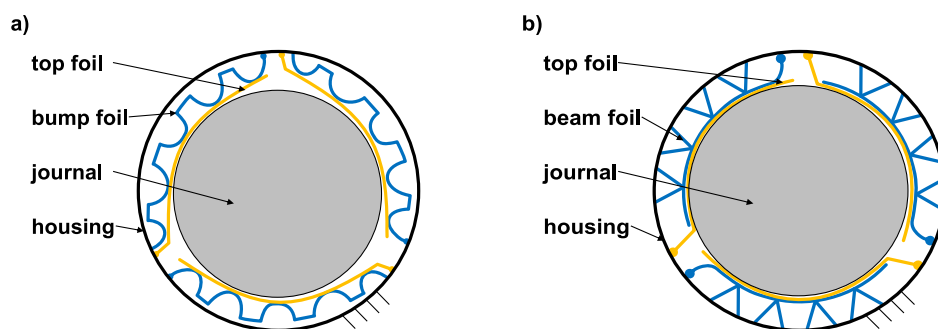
Classical air foil bearing designs: (a) bump-type and (b) beam-type supporting structure.
